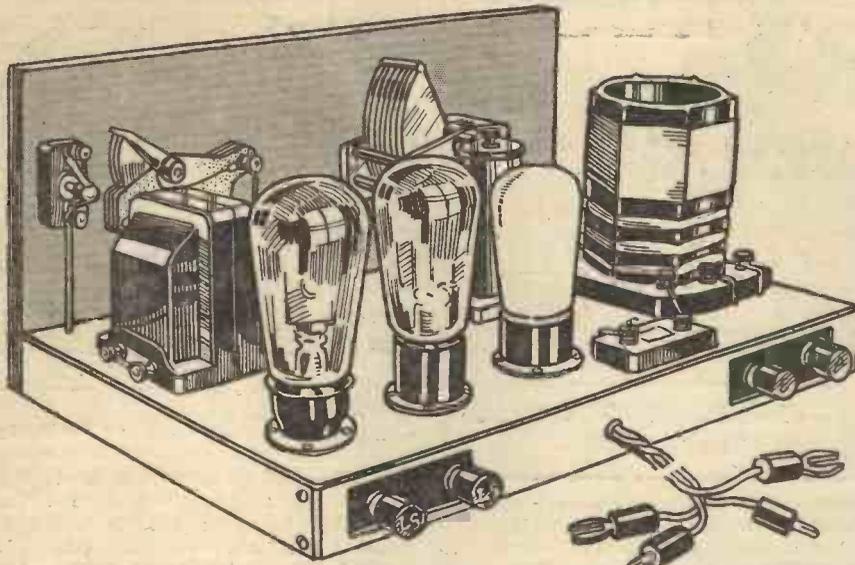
How the various parts are mounted on the "chassis" to form the complete receiver.
